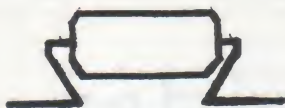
Bend the bottom parts of the chip's legs horizontal.
